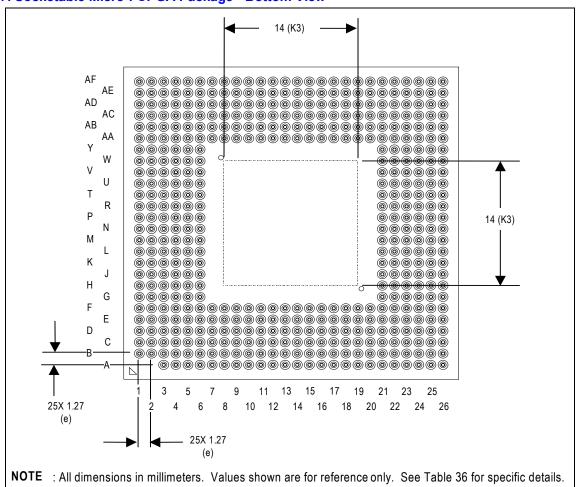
Socketable Micro-FCPGA Package - Bottom View
